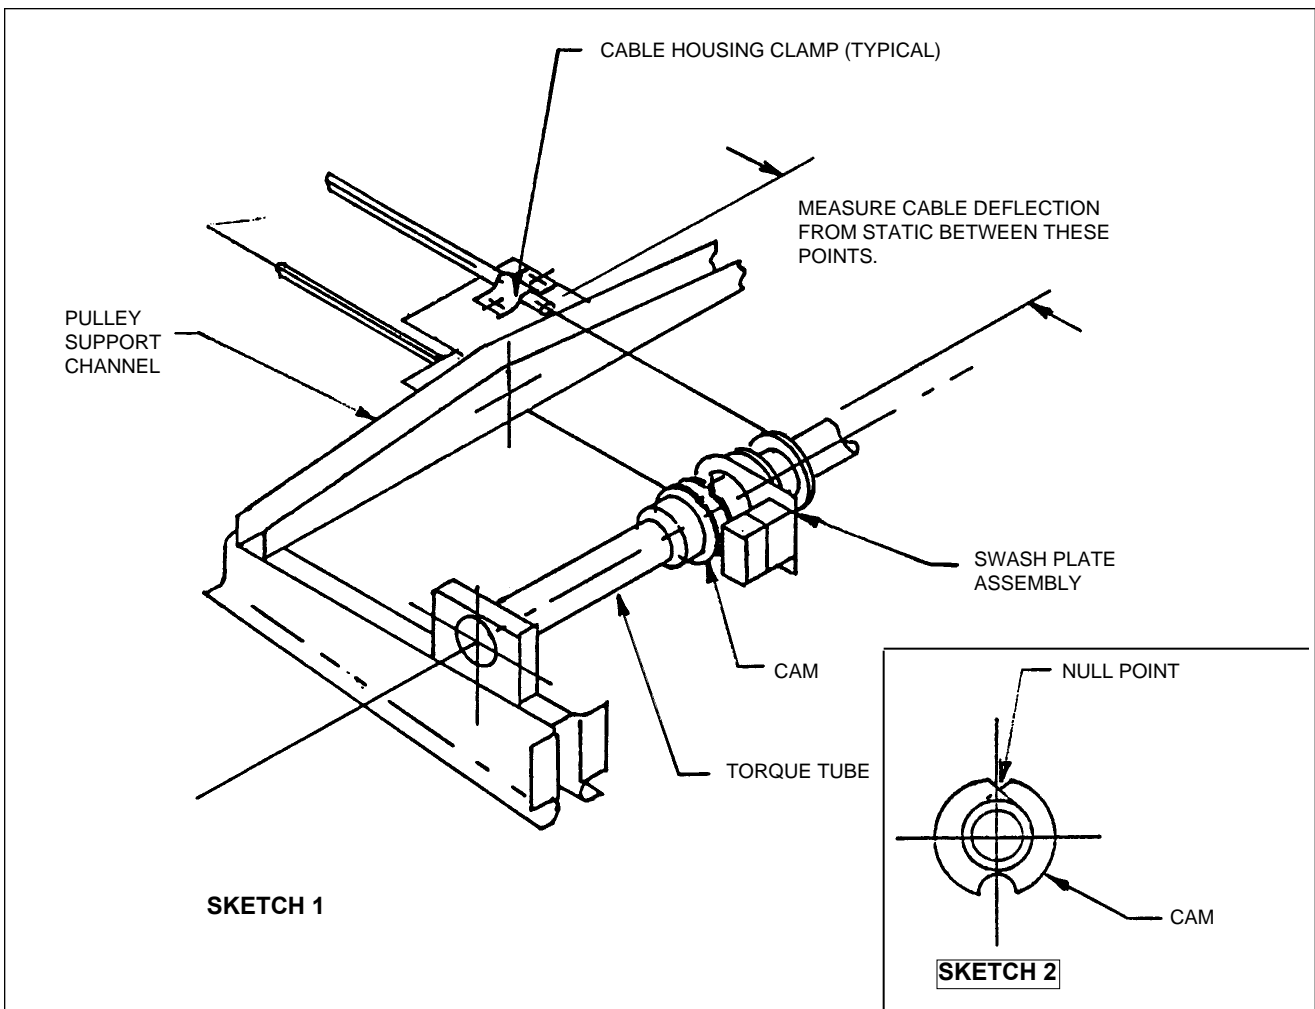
Rigging of Flap Cam-Cable Assembly
